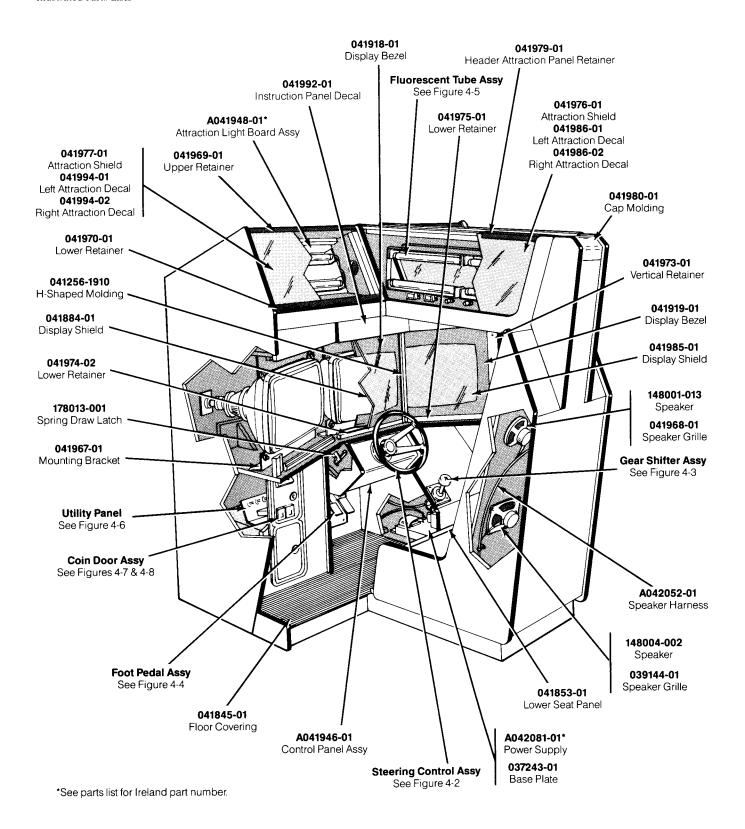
Cabinet-Mounted Assemblies A041945-XX A
